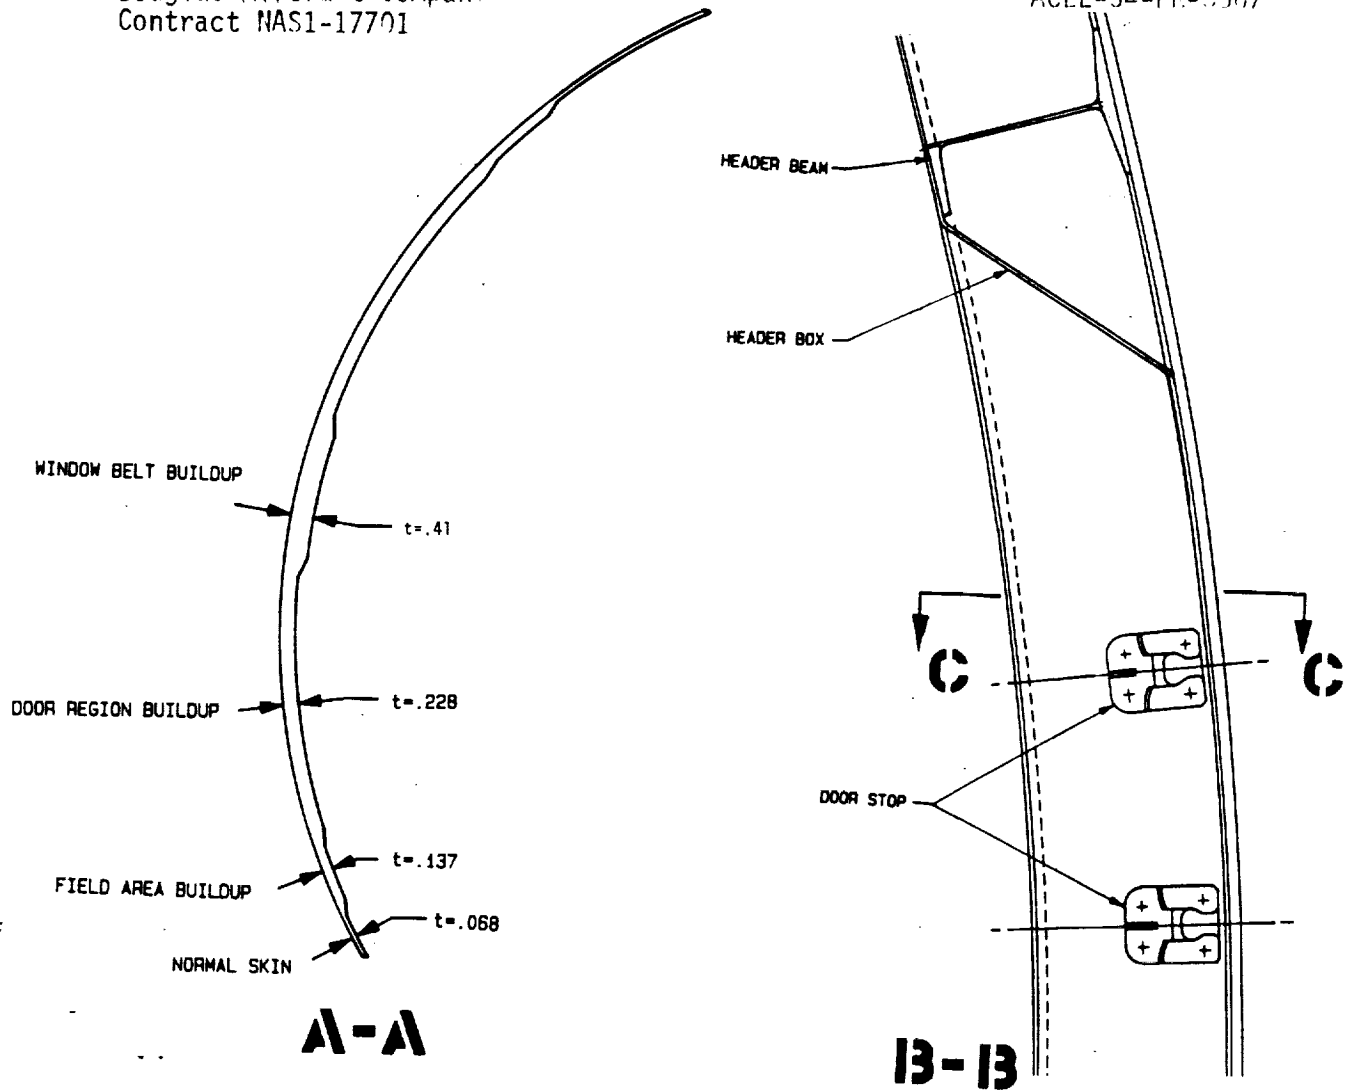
PASSENGER DOOR CUTOUT DETAILS
